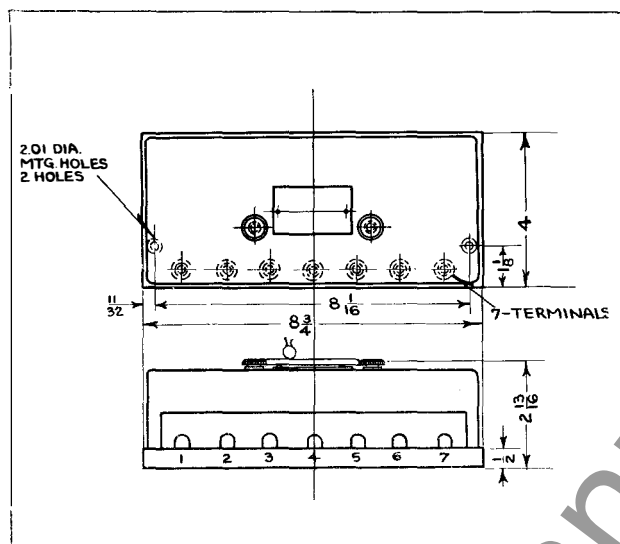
Types K-1, -3, -4, -5, -7, -9 Phase Shifting Transformers.
